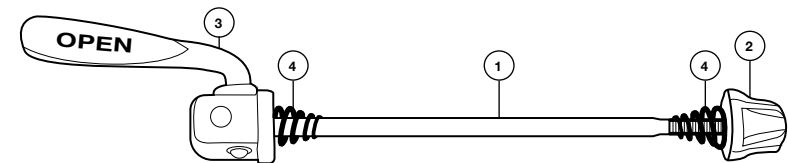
Quick release wheel axle: ① Shaft ② Nut ③ Lever ④ Conical spring
